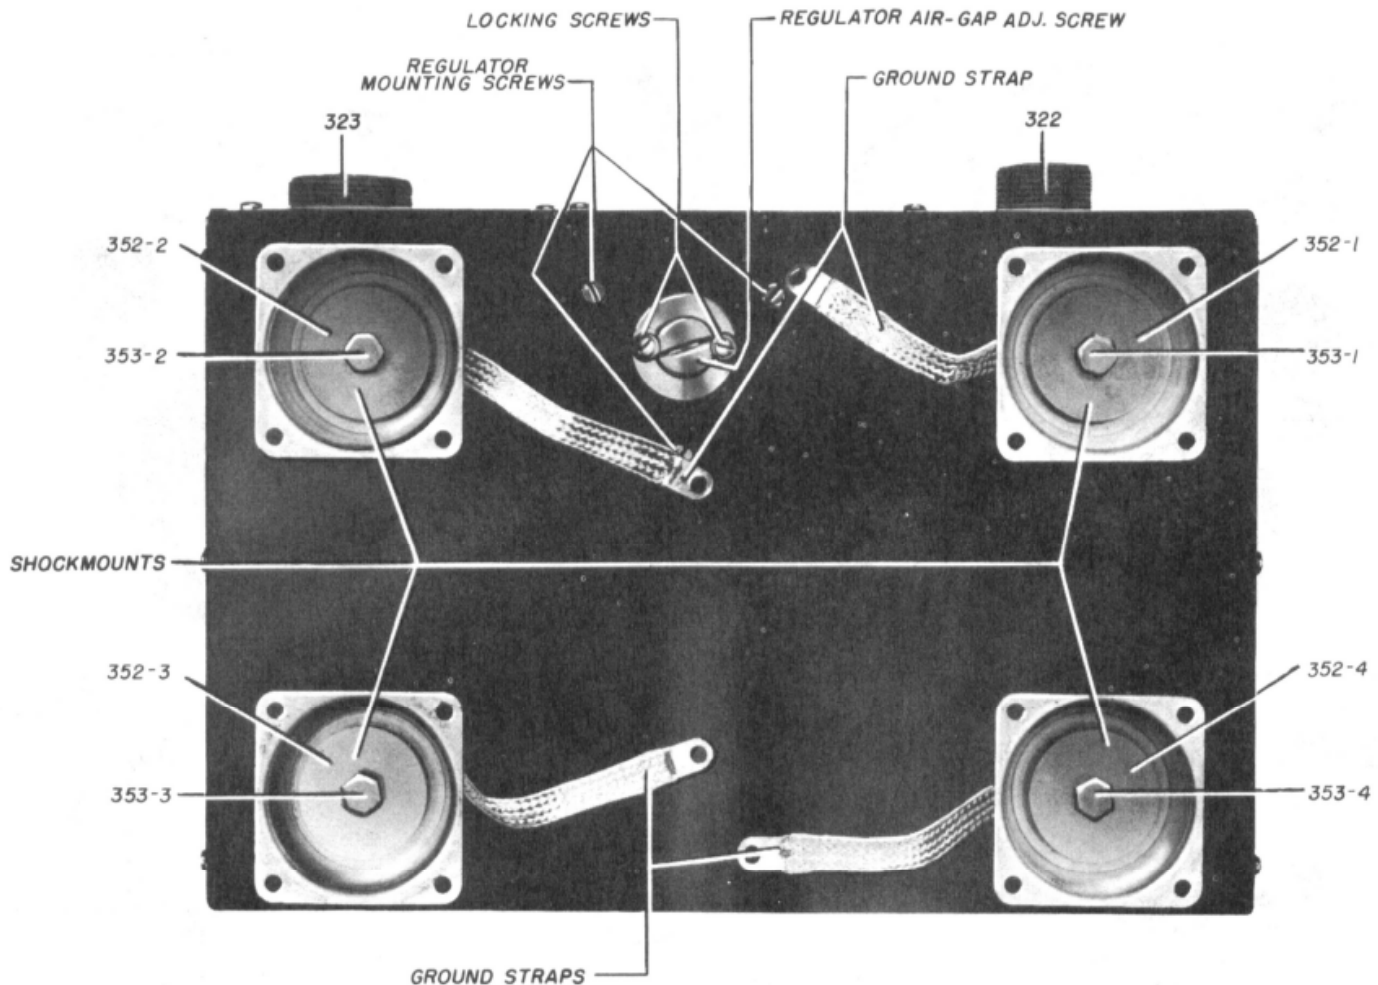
DYNAMOTOR UNIT PE-94-A OR PE-98-A, BOTTOM VIEW
